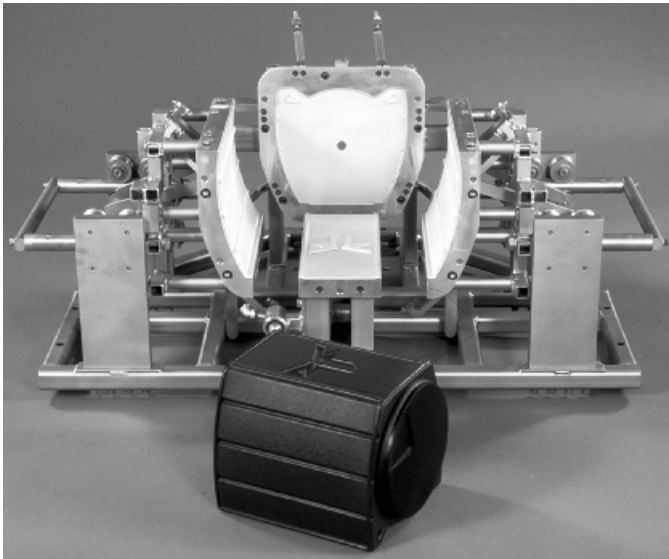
Roller guides used on a machined aluminium mold. (Courtesy of Wheeler Boyce, Inc.)
